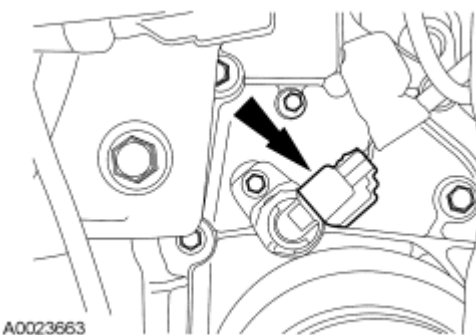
Turbine Shaft Speed (TSS) Sensor Connector
